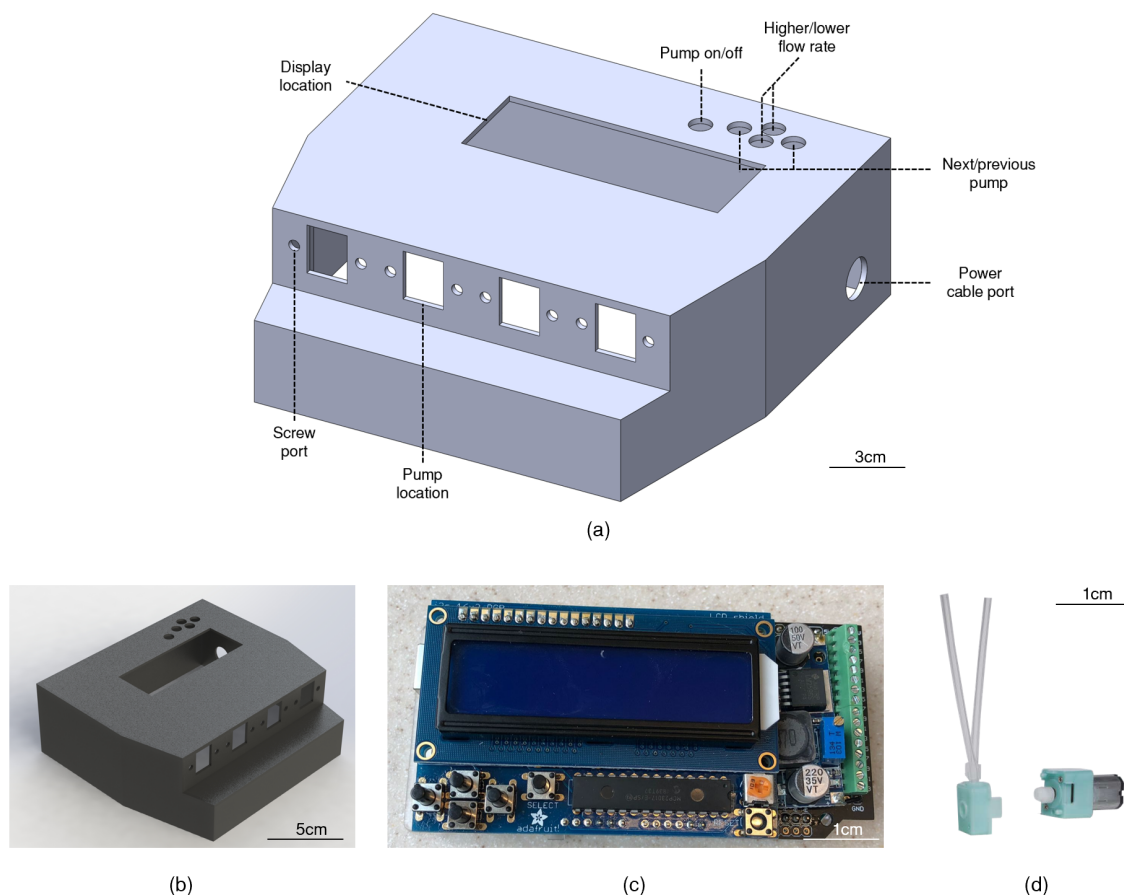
Pump unit components. (a) CAD model of the PLA housing. (b) CAD render of the PLA housing (c) Pump control unit. (d) DC peristaltic ring pumps with detachable heads.
